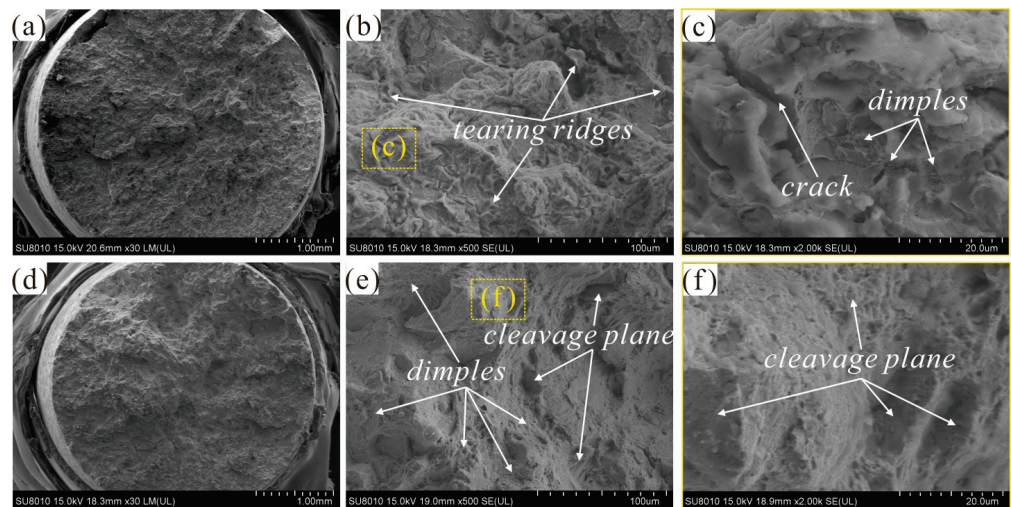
Fracture morphology of the tensile specimens of (a–c) all–weld–metal, and (d–f) base metal specimens.
